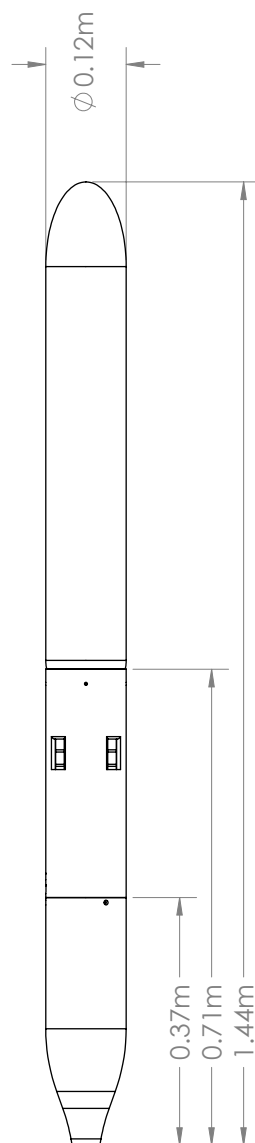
Schematic drawing of the entire PVG-integrated AUV.
